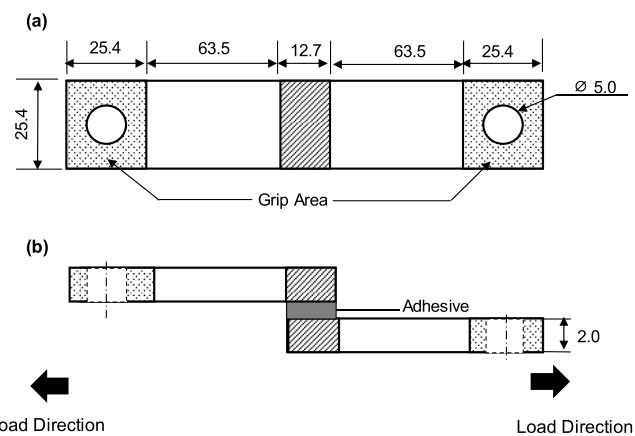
Schematic of the tensile shear test for single lap joint specimen (a) dimension in mm according to ASTM D 1002; (b) schematic of single lap joint specimen (load direction).
